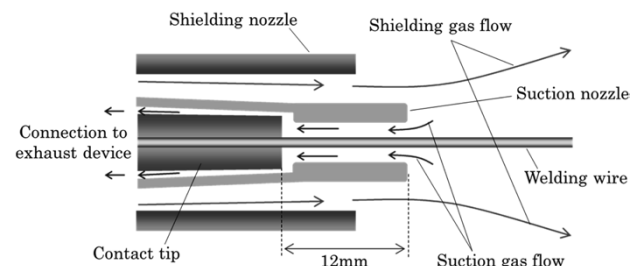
Structure and dimension of developed welding torch (Longitudinal section)
